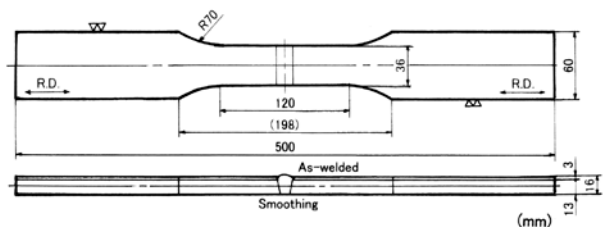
Shape and size of fatigue test specimen (Butt welded joint)
